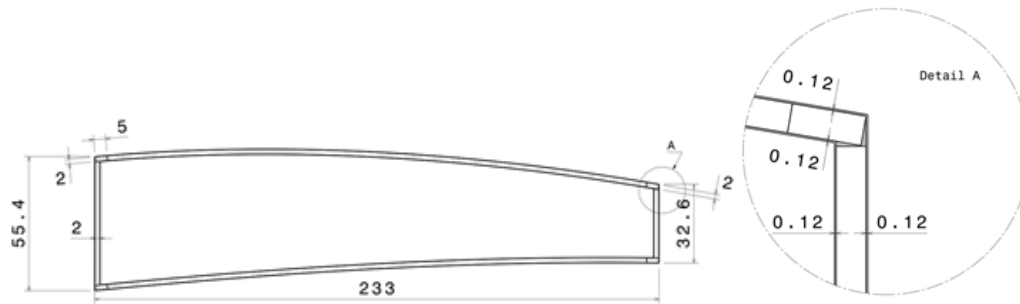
Outboard moving wing cross section showing structure dimensions (in mm)
